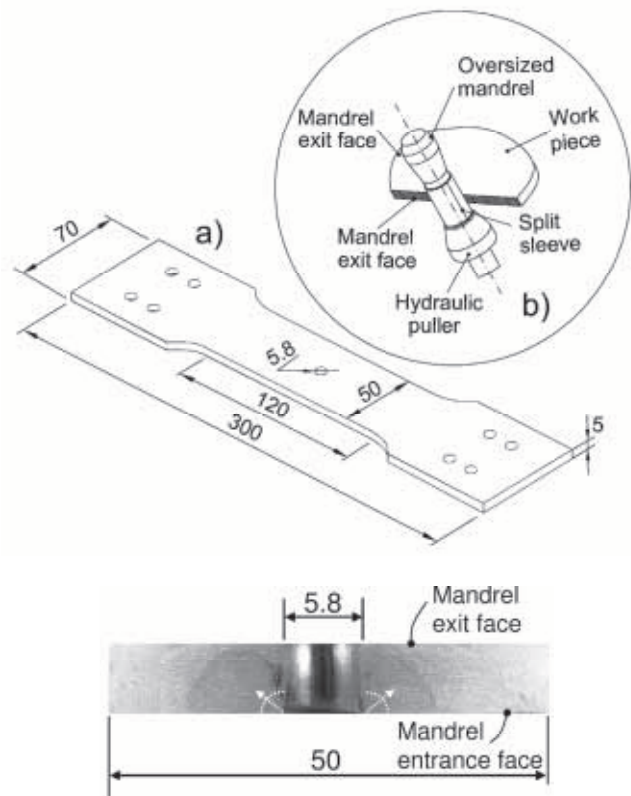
a) Geometry of the specimen; b) Detail of the cold expansion process; c) Typical fracture surface of a cold expanded hole, after Pasta [8].
